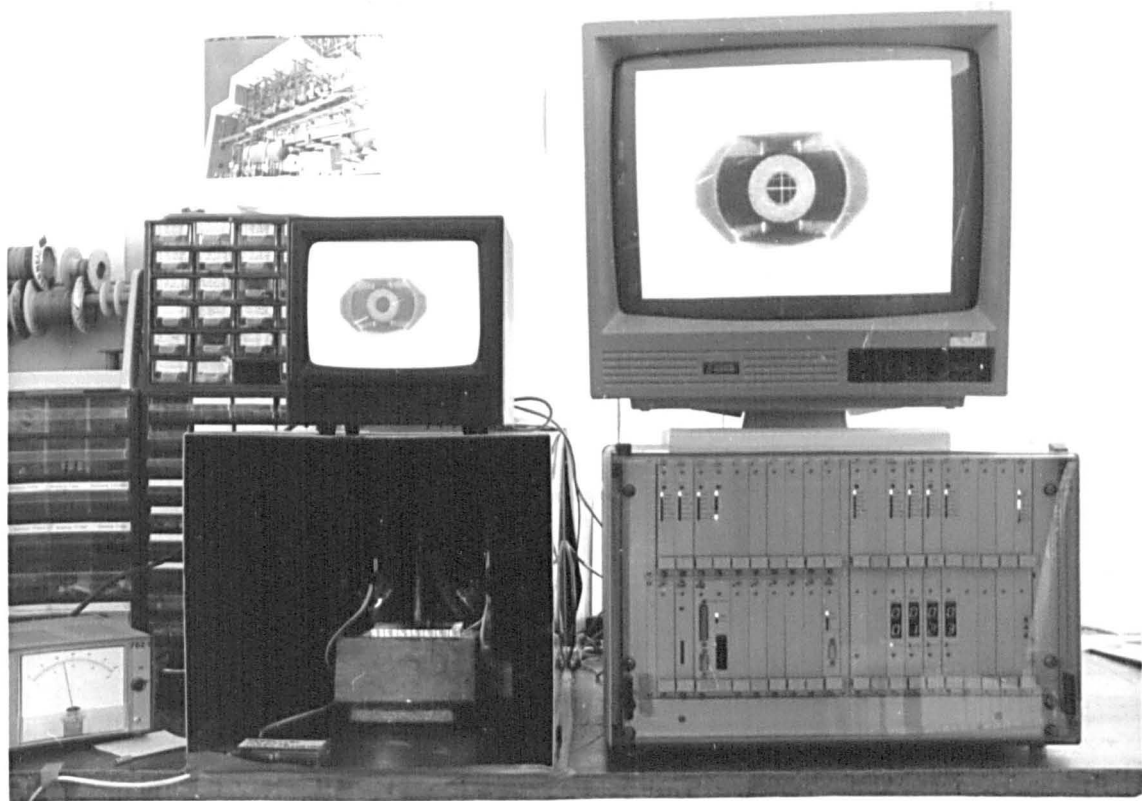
Ferroxcube inductor core measurement and inspection running on TIPS
